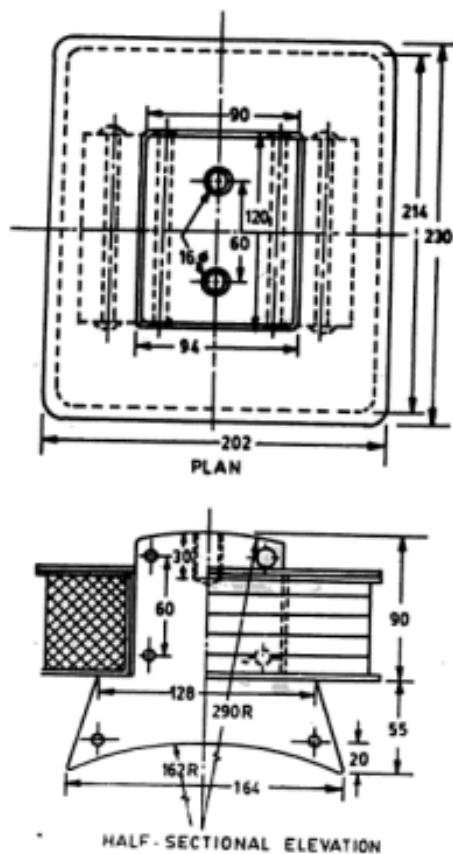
Plan and half sectional elevation of the assembly view of the field pole and field coil of a d.c. machine of figure 3.47 (Solution of example 1)
